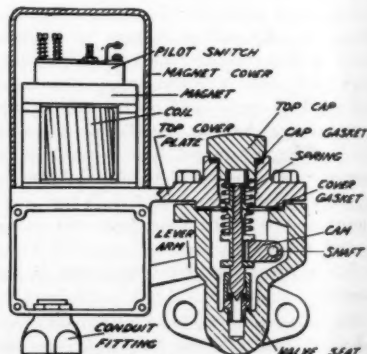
SECTIONAL VIEW OF MAGNETIC LIQUID STOP VALVE.
